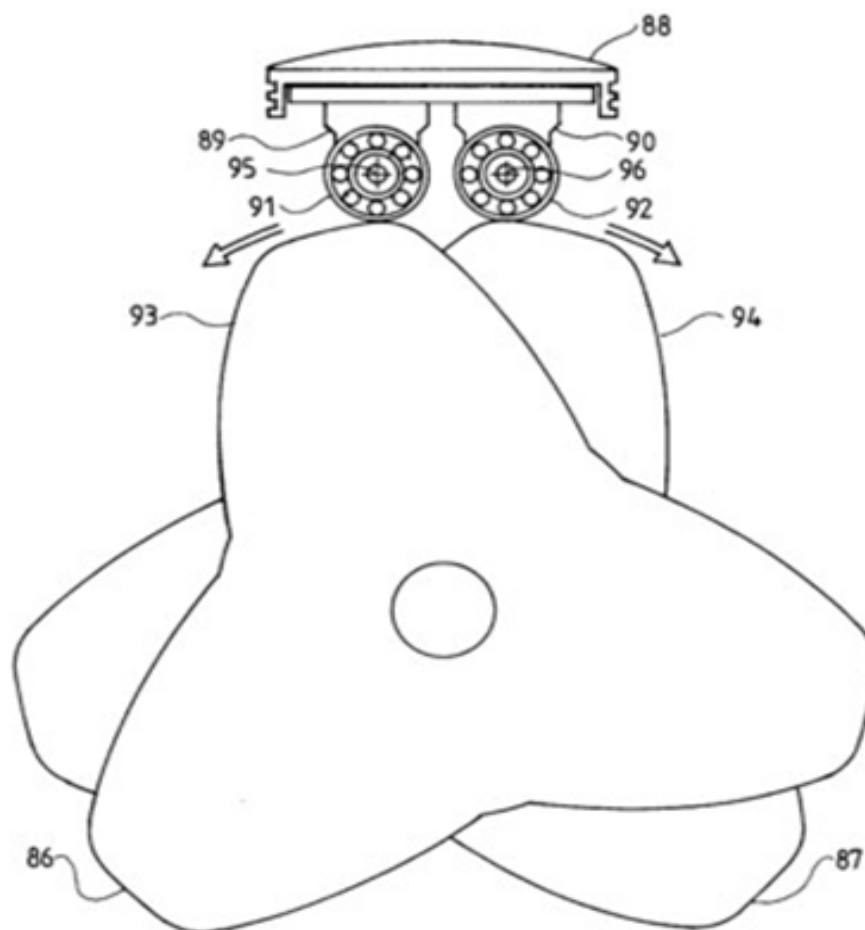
View of portion of an engine showing a piston in contact with counter rotating trilobate cams.
